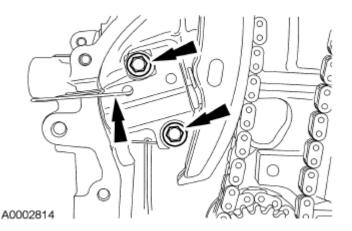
Locating Timing Chain Tensioner And Bolts Courtesy of FORD MOTOR CO.
